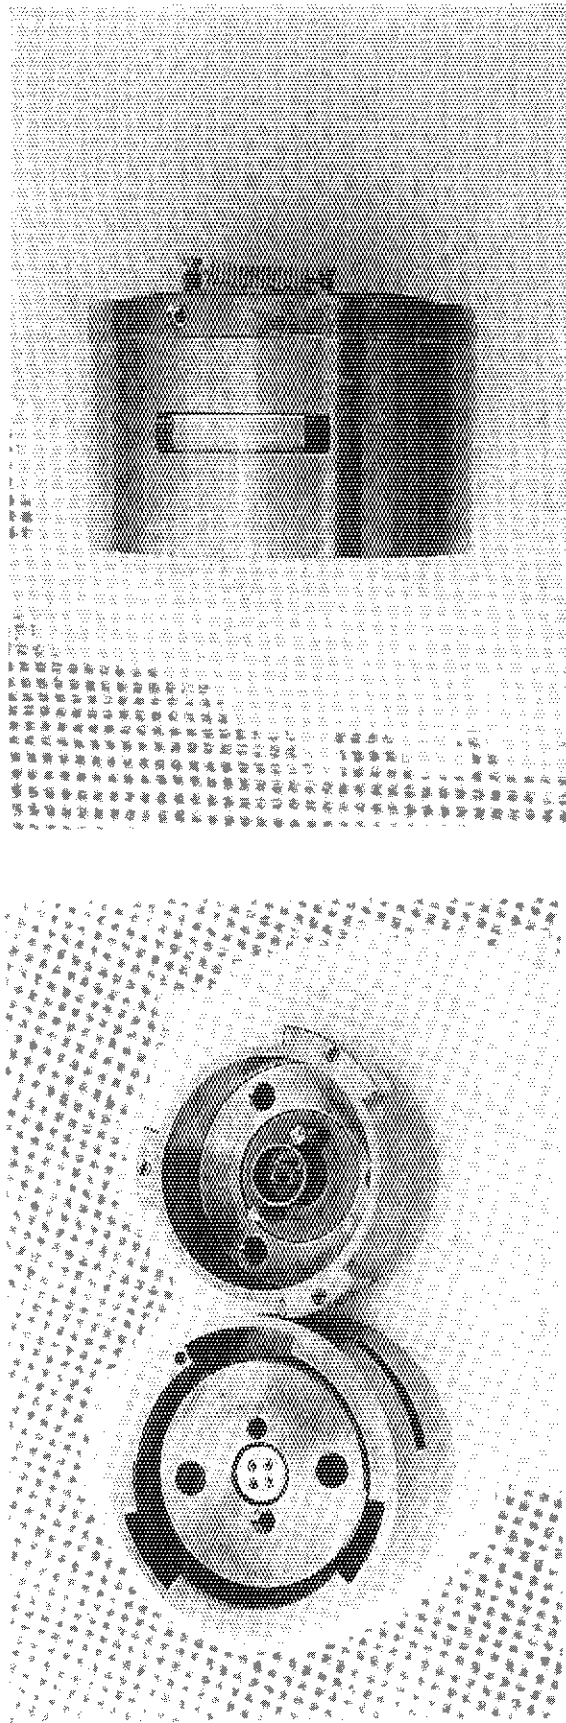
Fabricated receptacle and plug of 1st step connector
